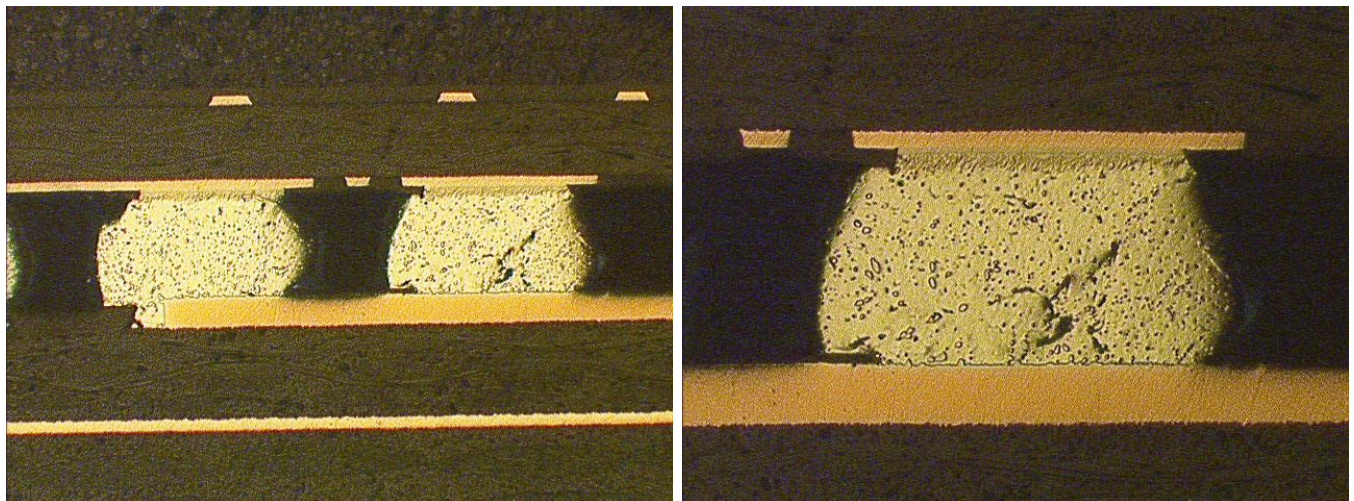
CSP-100 Solder Joints, Board 124, Component U32, SnPb/SAC105, Failed @ 287 Cycles
